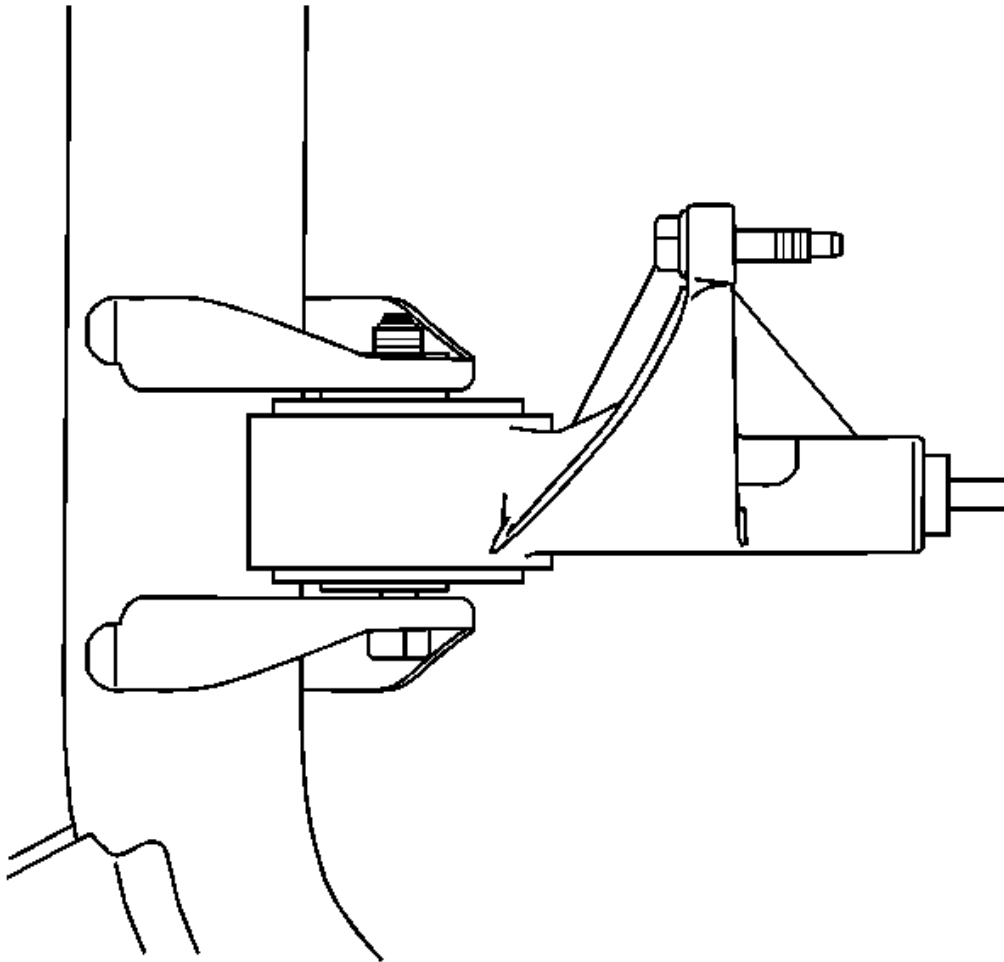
View Of Transmission Mount Centered In Clevis On Cradle
